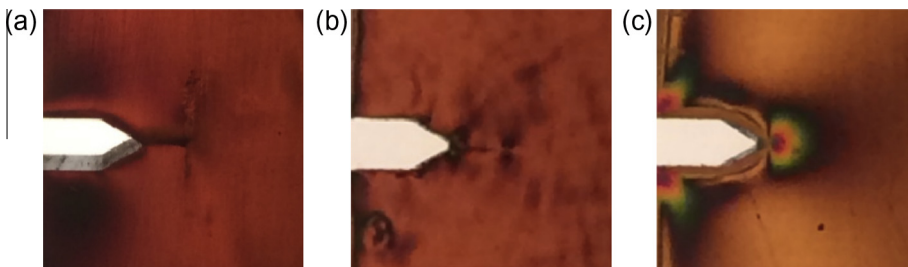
Showing residual strain CNC-machined specimens with a crack introduced (a) using the T-clamp method; (b) using razor tapping; and (c) a specimen machined using traditional machining methods (notch only). The specimens were viewed in a white-light, dark field, circular polariscope [9].
